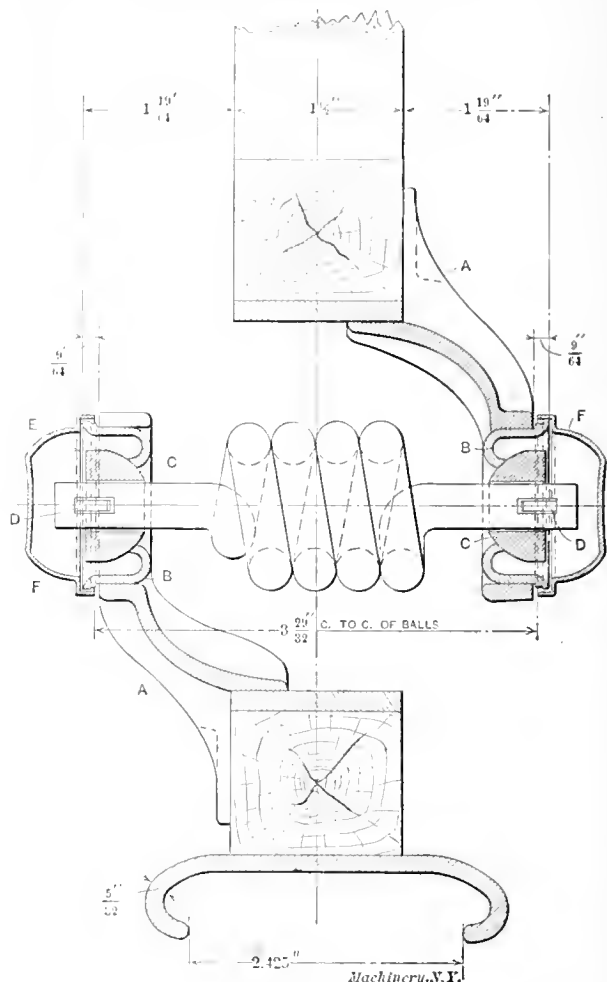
Detail of the Bracket and Spring, showing the Ball and Socket Bearing
